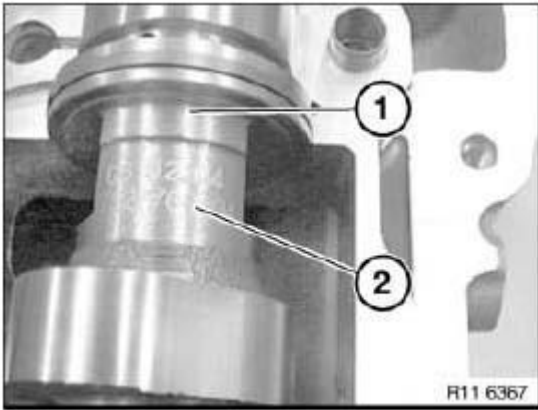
Identifying Inlet And Exhaust Camshafts Part Number
